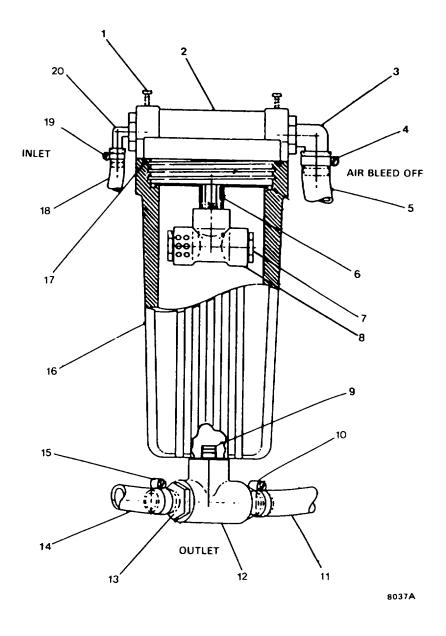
Air/Oil Separator Assembly Maintenance (Sheet 2 of 2).
